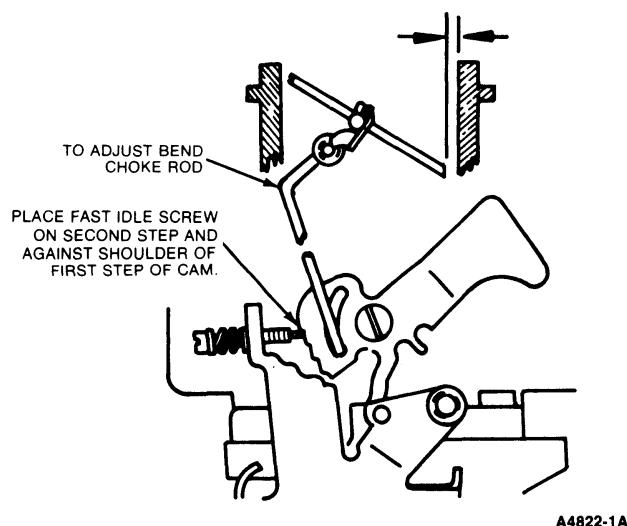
Fast Idle Cam Index Setting—Carter YFA-IV (Hot Air With Electric Assist) Carburetor
